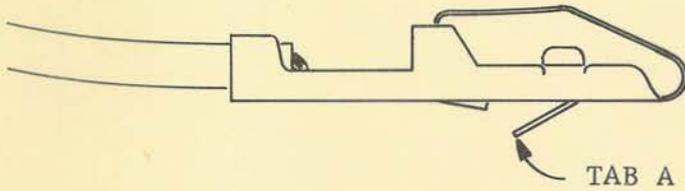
TRANSMITTER COAX ASSEMBLY
